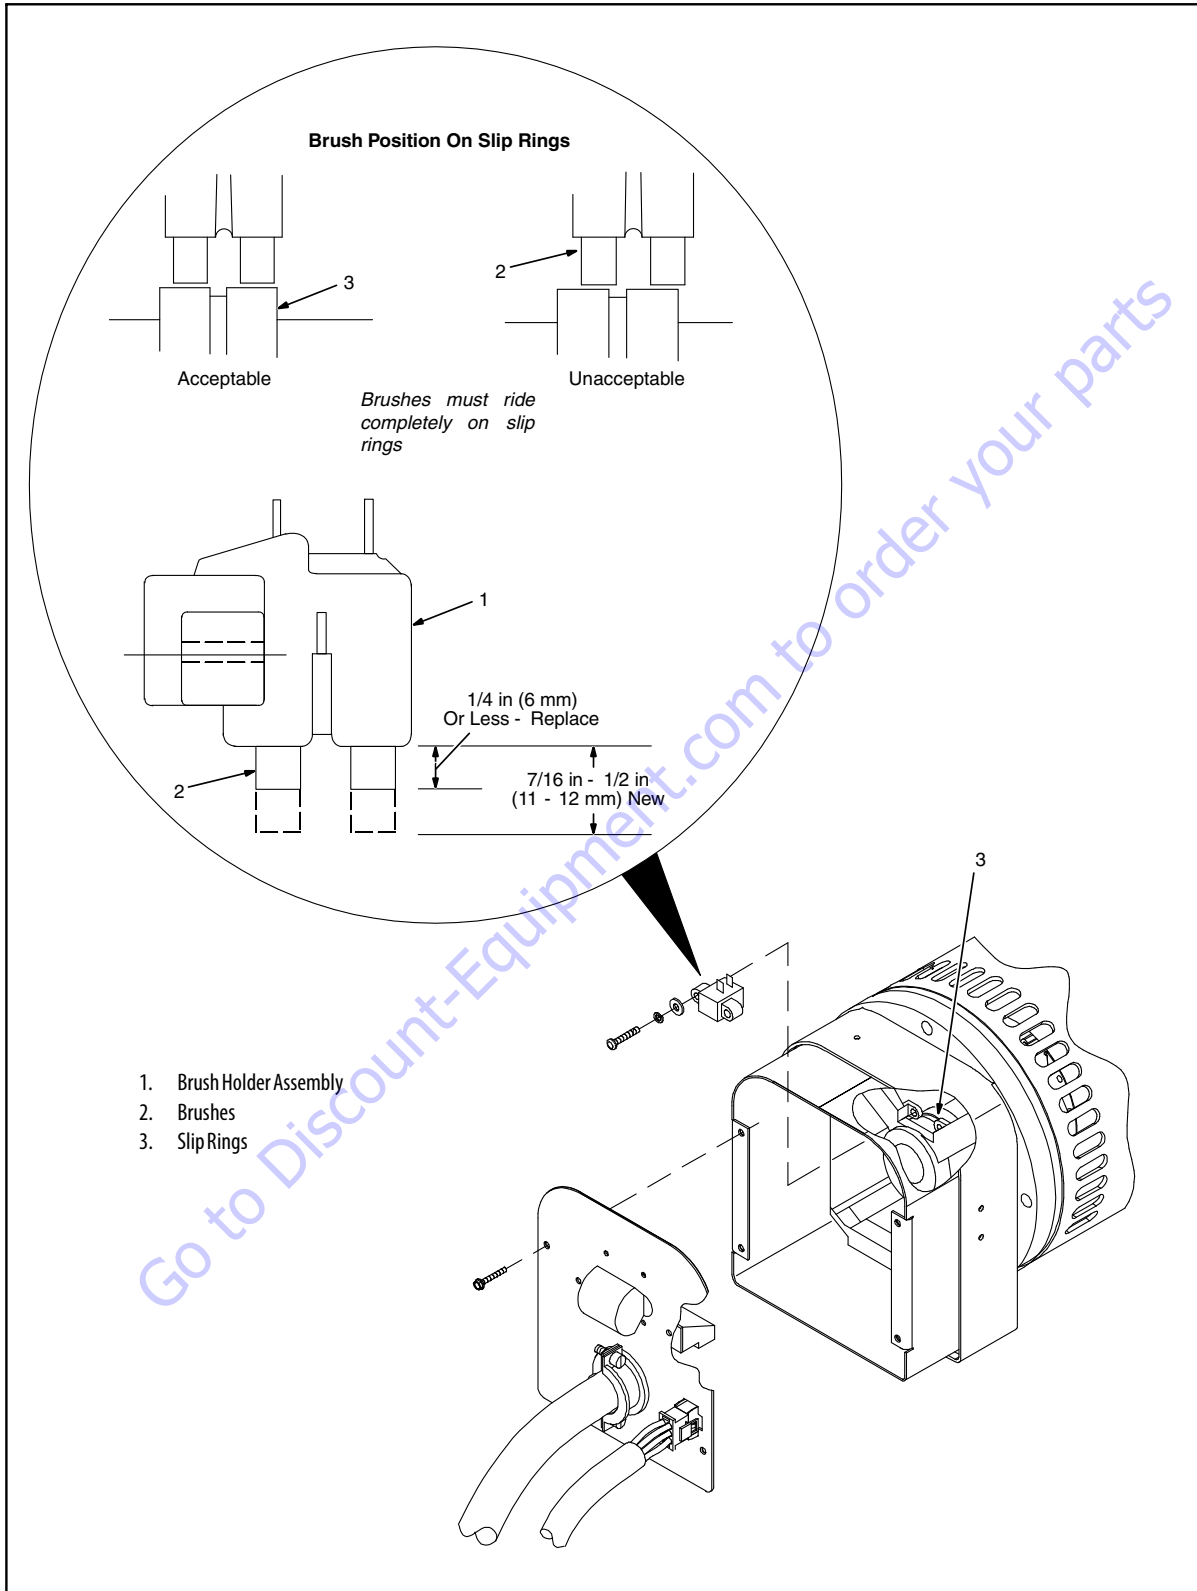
Inspecting Generator Brushes, Replacing Brushes, and Cleaning Slip Rings
